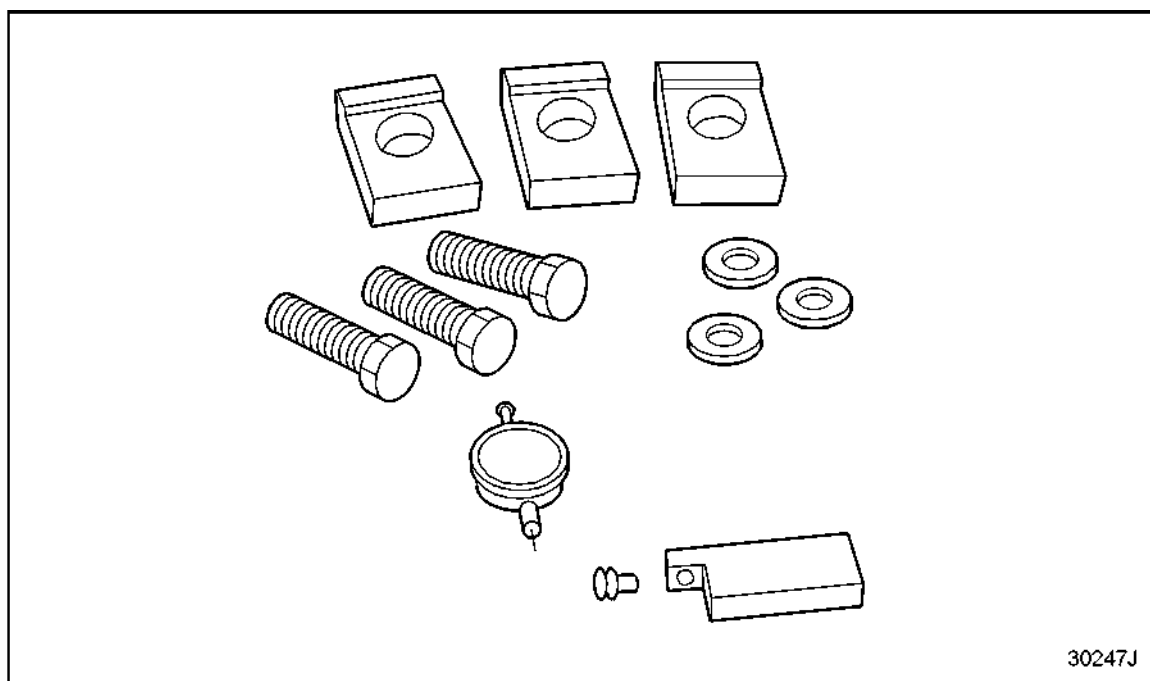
Cylinder Sleeve Holding Adapters,J 43095
